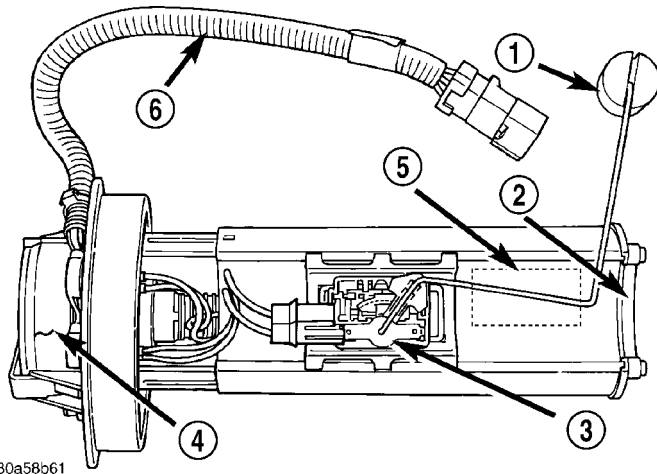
FUEL TANK/FUEL PUMP MODULE (TOP VIEW)
